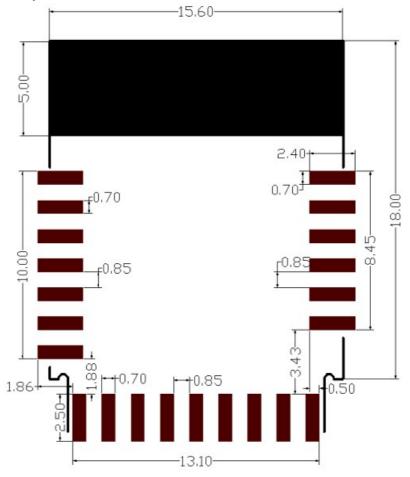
SMD PCB Land Pattern (Unit: mm)
